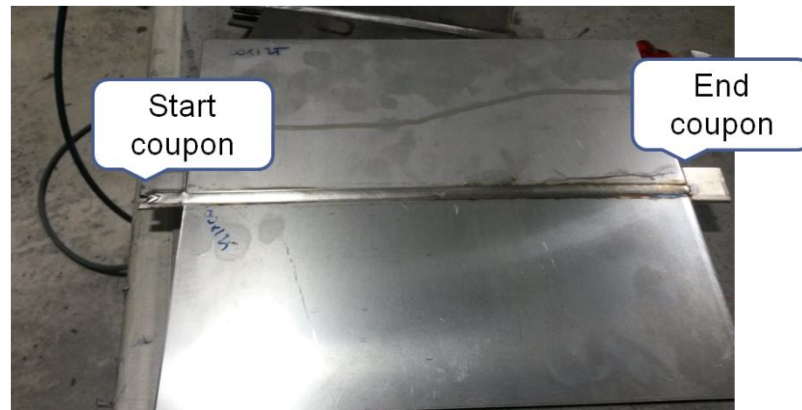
Welded specimen with start and end coupons.
